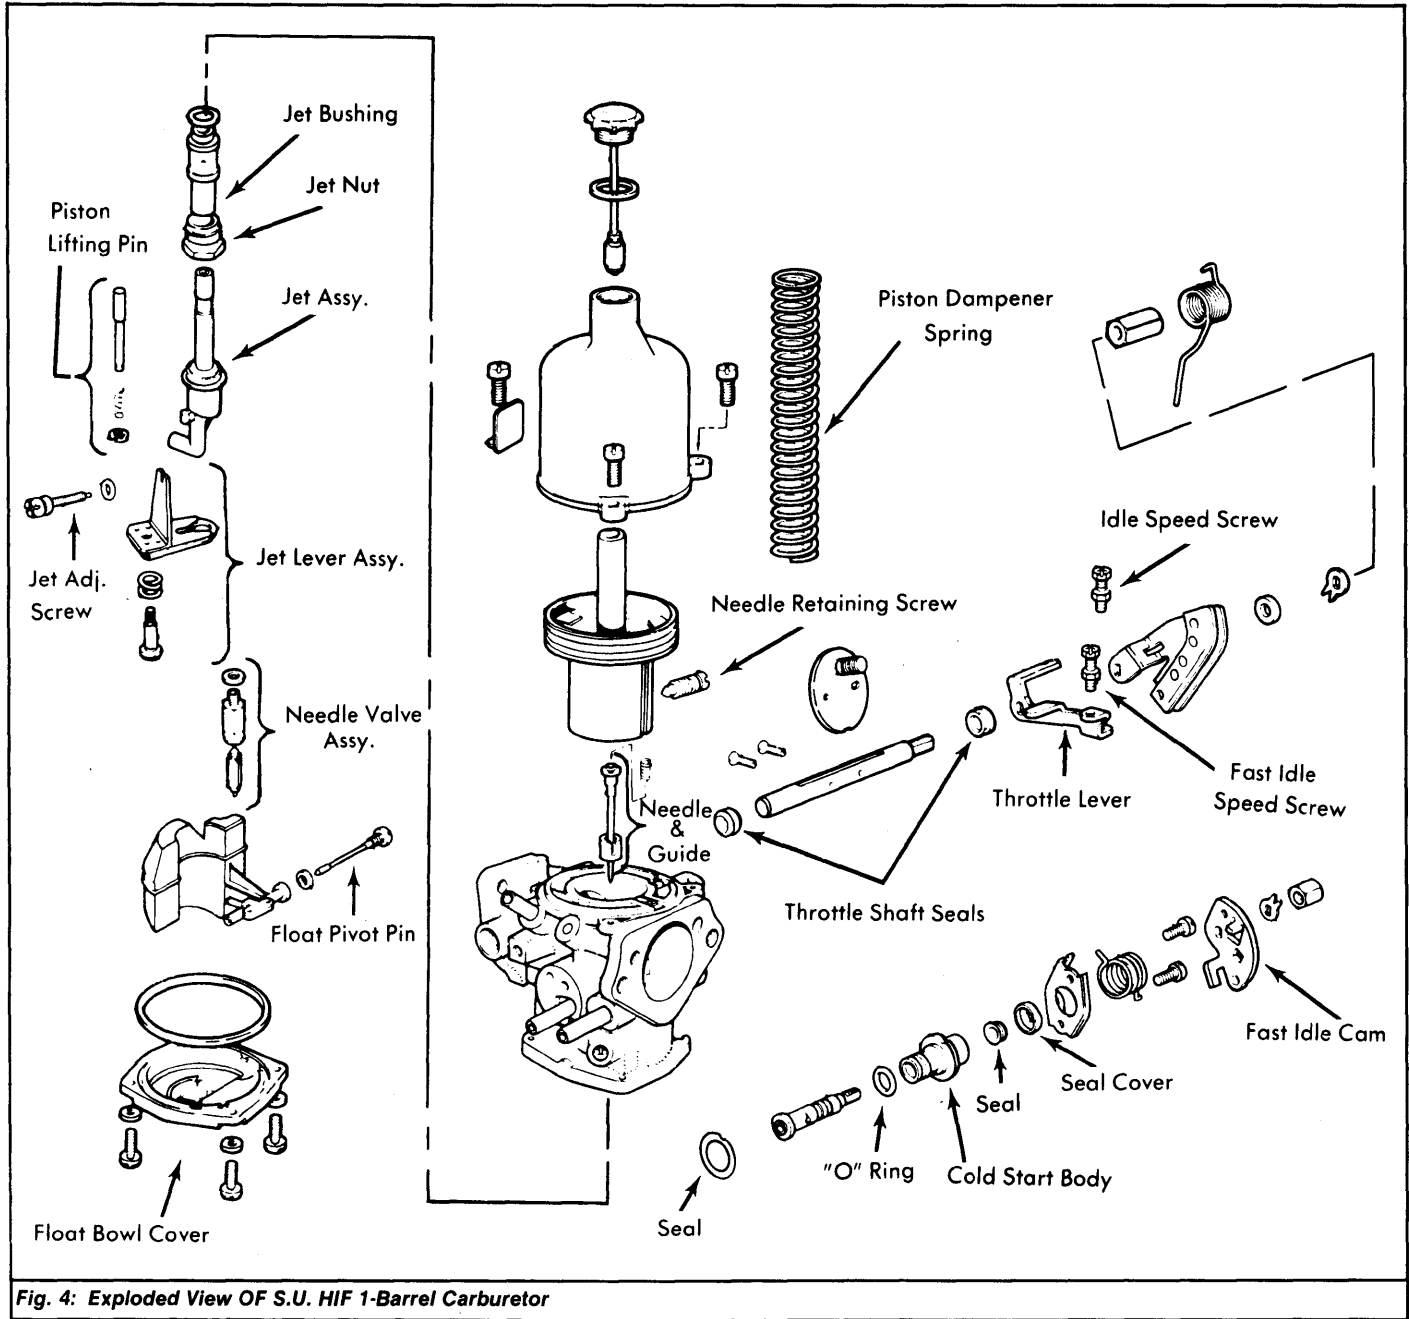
Exploded View OF S.U. HIF 1-Barrel Carburetor
